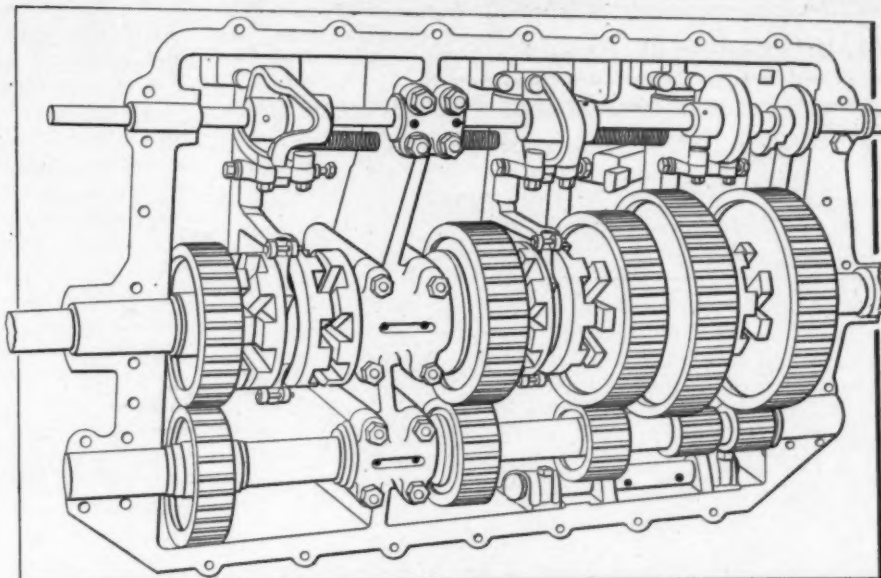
Plan view of the four-speed type jaw-clutch transmission, showing the dog clutches and cam operating mechanism
